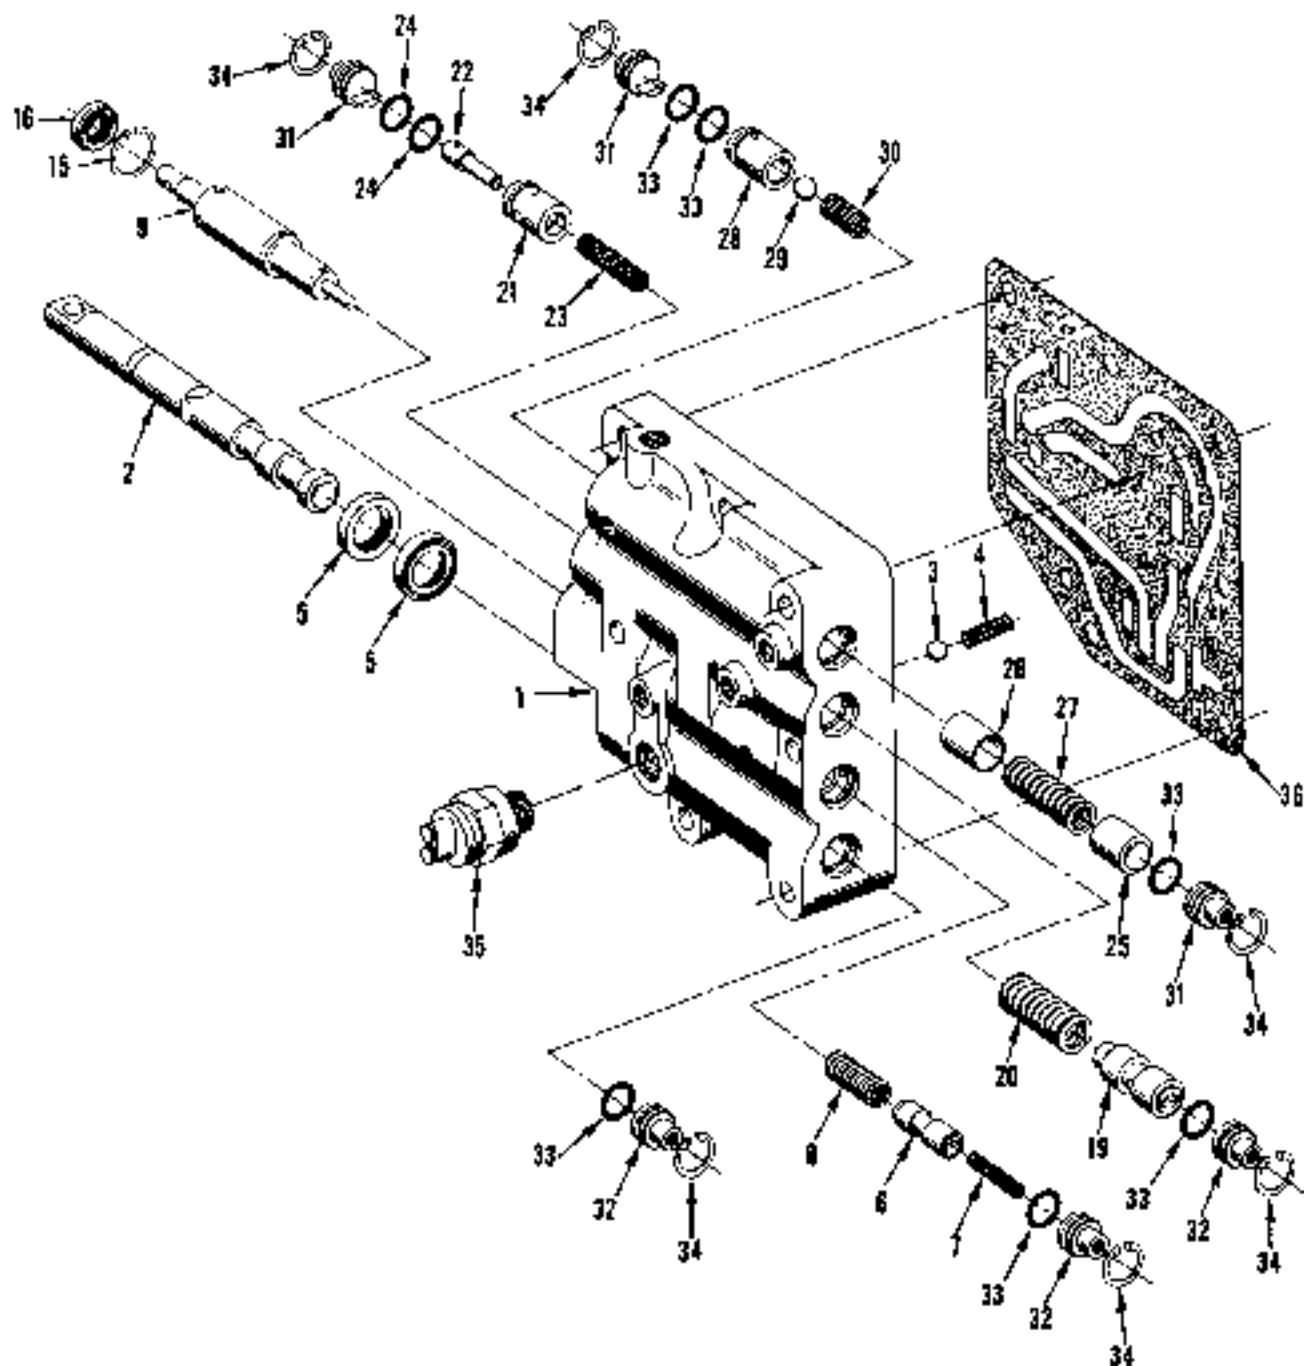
B - TRANSMISSION CONTROL VALVE
